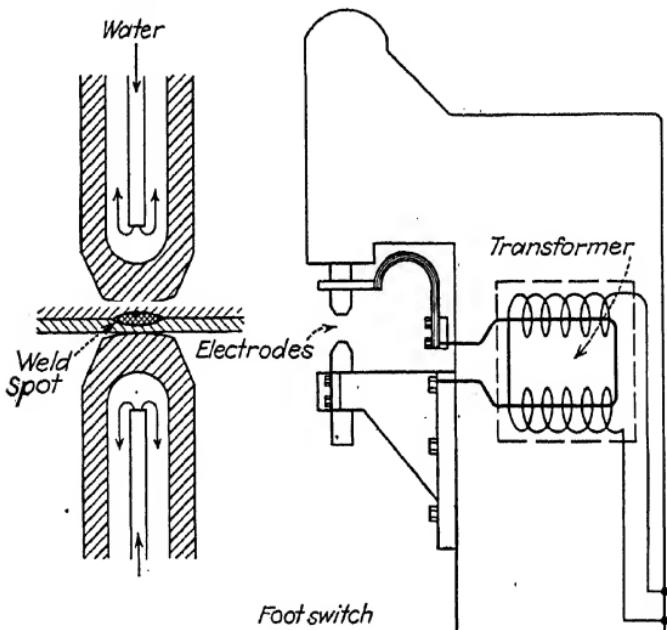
A.—A welding machine, showing circuits and electrode tips.
